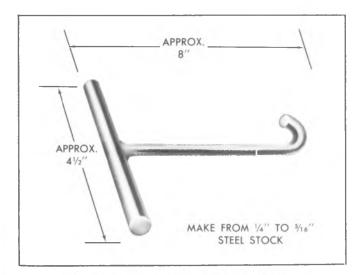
C-1--Hood Hinge Spring Remover/Installer
